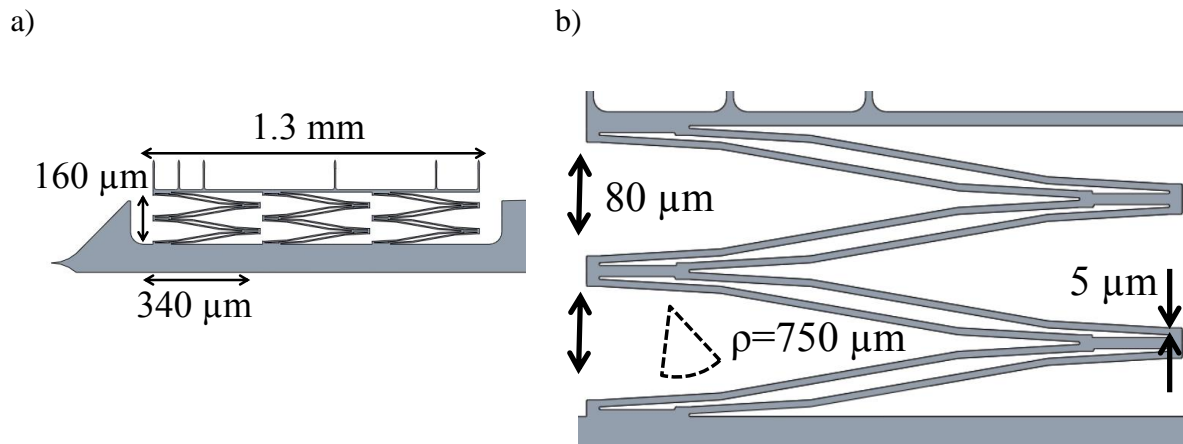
Dimensions of the silicon springs used as exemplary substrate. All designs had 12 μm uniform thickness and 5 μm width. a) drawing of a set of six springs with 160 μm travel b) close-up on one pair of springs
